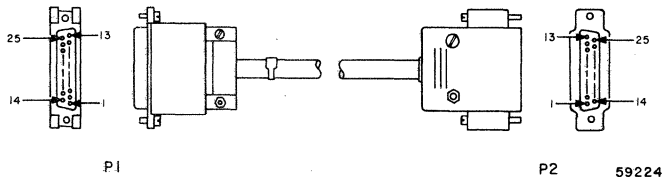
Terminal to Modem Cable Assembly (P2 Metric Connection) 2822140
